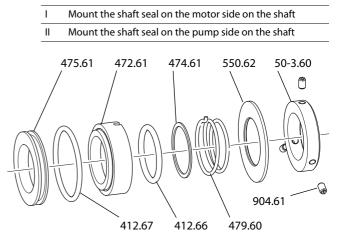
Application case B, mounting the shaft seal on the motor side (I)
